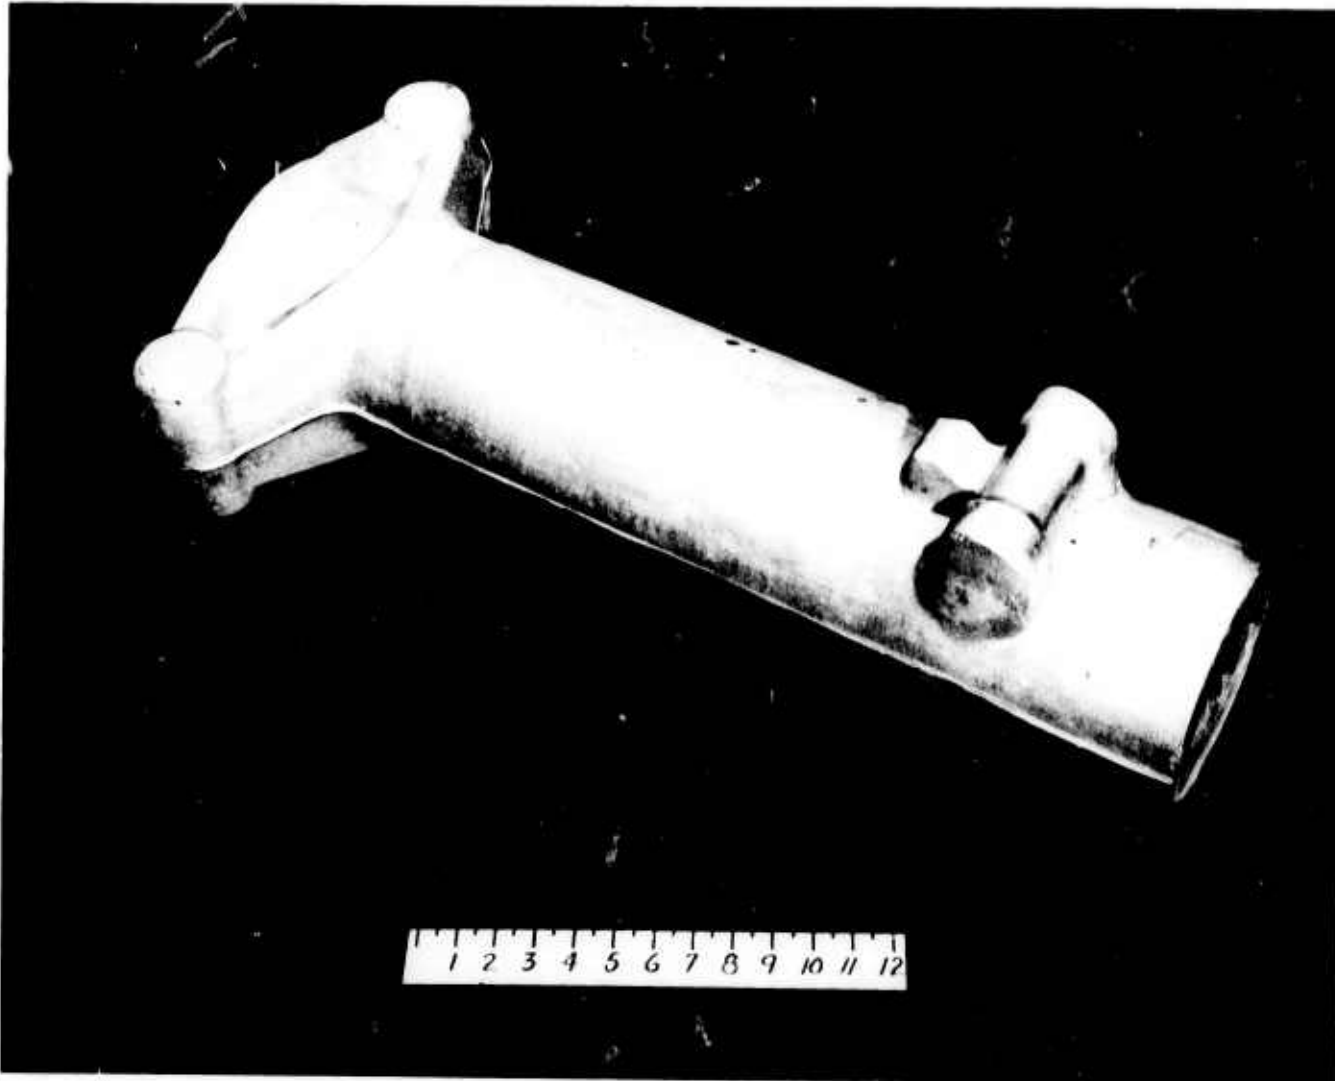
Landing Gear Die Forging of Alloy 21. The Forging Is 6.75 Inches in Diameter by 33 Inches Long (Three Each).
